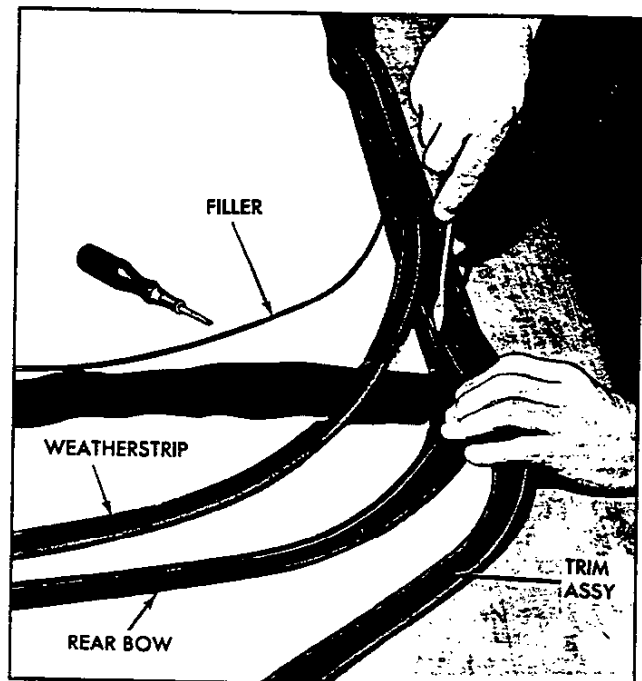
Installing Trim and Weatherstrip to Rear Bow
